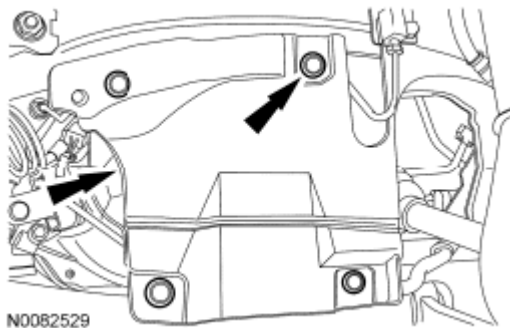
Identifying Pin-Type Retainers & LH Splash Shield
